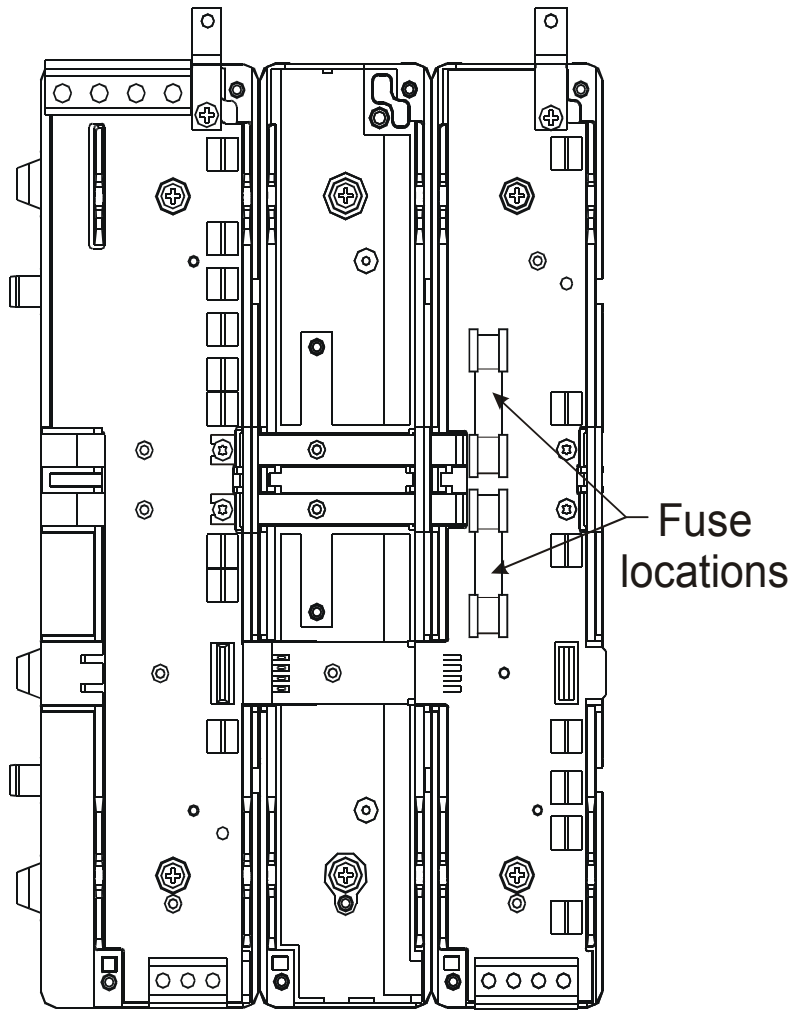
Fuse Location in a Drive Module Backplane - MP-2500/MD-434 Shown
